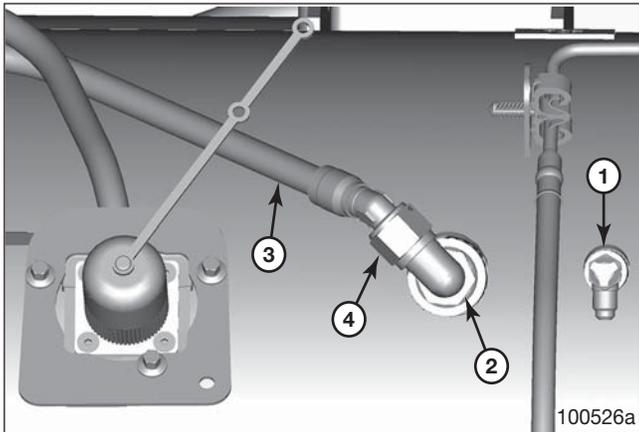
Mechanical Fill Valve/OPD – F-650 LH Dual Tank
